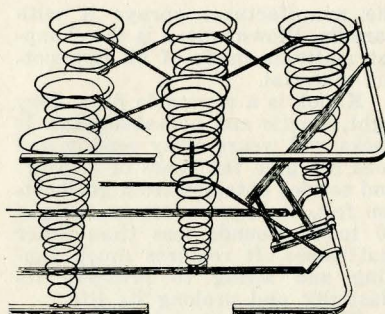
Open vertical coil, top and center spring tied, steel foundation and frame, automatic brace connection.
